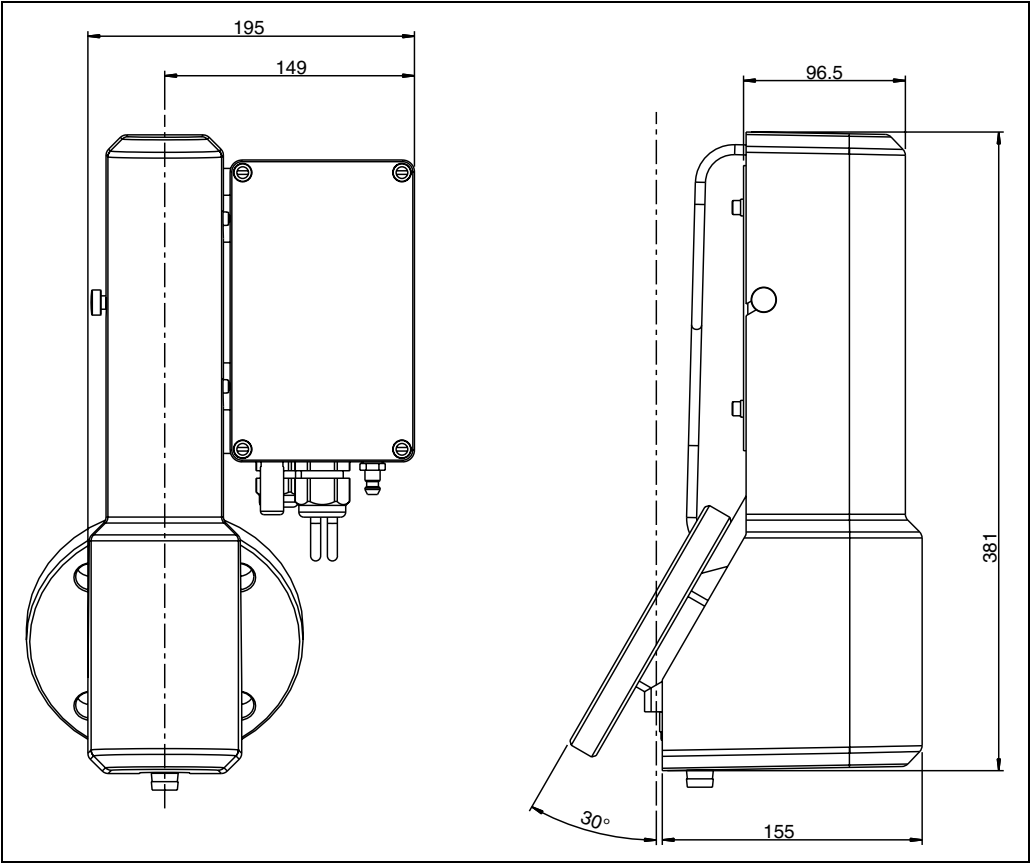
Dimensions of the ASP Inline sampler assembly with 5 ml sample volume (specifications in mm)
